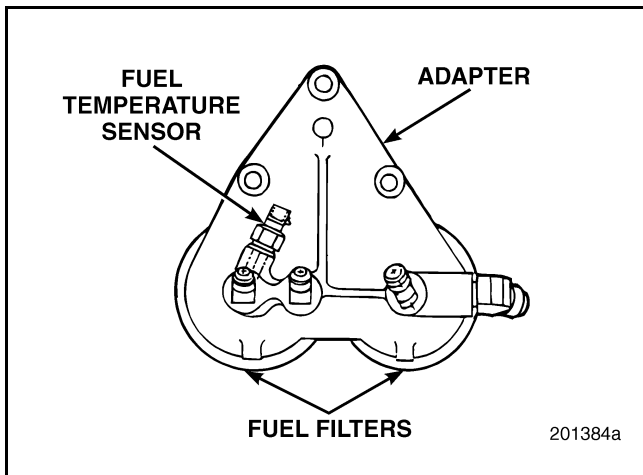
Fuel Temperature Sensor (Engine with Right-Side Mounted EECU)
